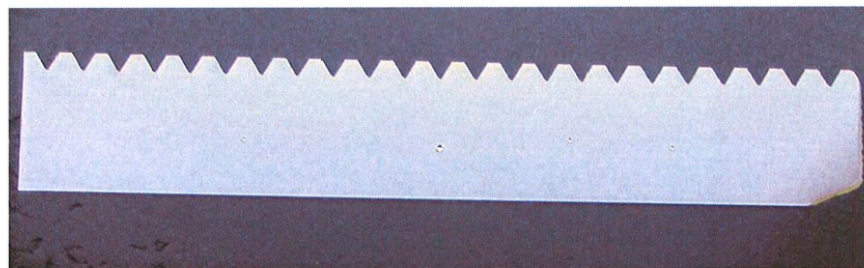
Longitudinal section of female threads showing fully intact thread profile.
